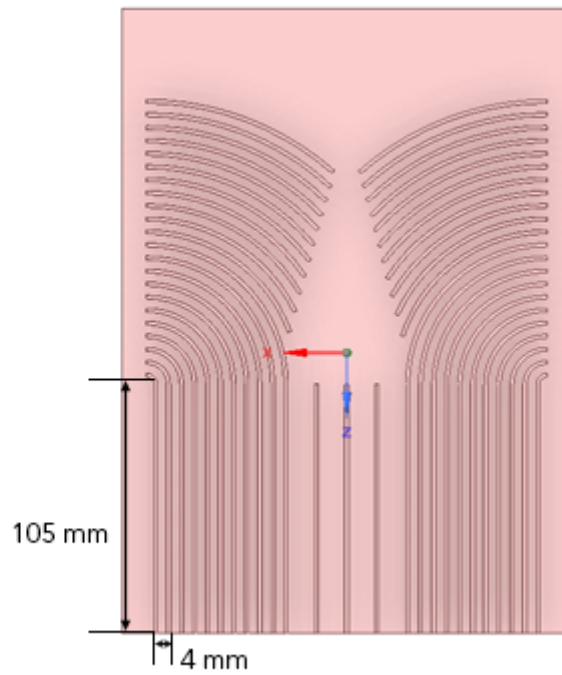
Layout and dimensions of the ducts in the lower HS.
